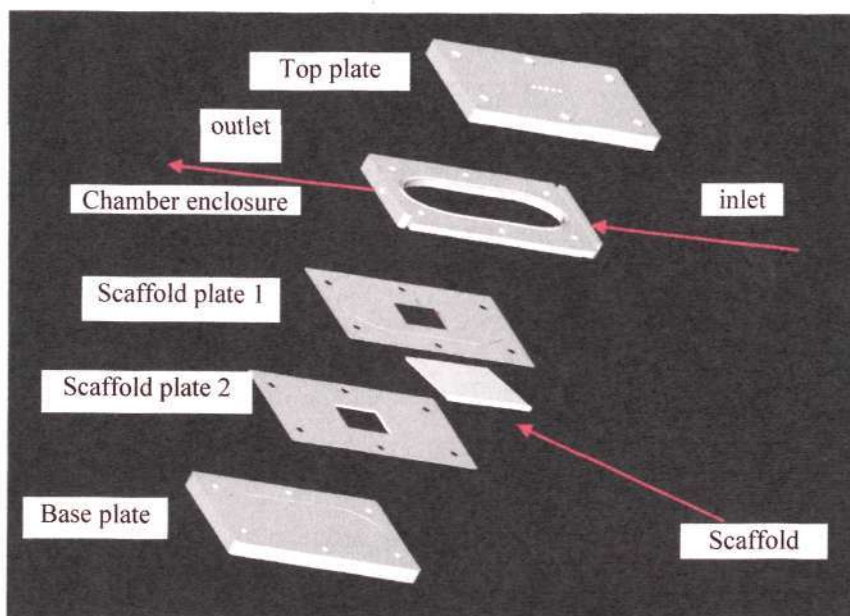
Explosion view of modular bioreactor chamber: Chamber enclosure is a pill-shaped geometry for flow to fully develop before crossing the scaffold region. Ports from each side allowed medium flow in and out of the chamber. Scaffold was sandwiched between 2 mounting plates with gasket to secure the position of the scaffold. All the bioreactor modules were assembled with six M4 screws.
